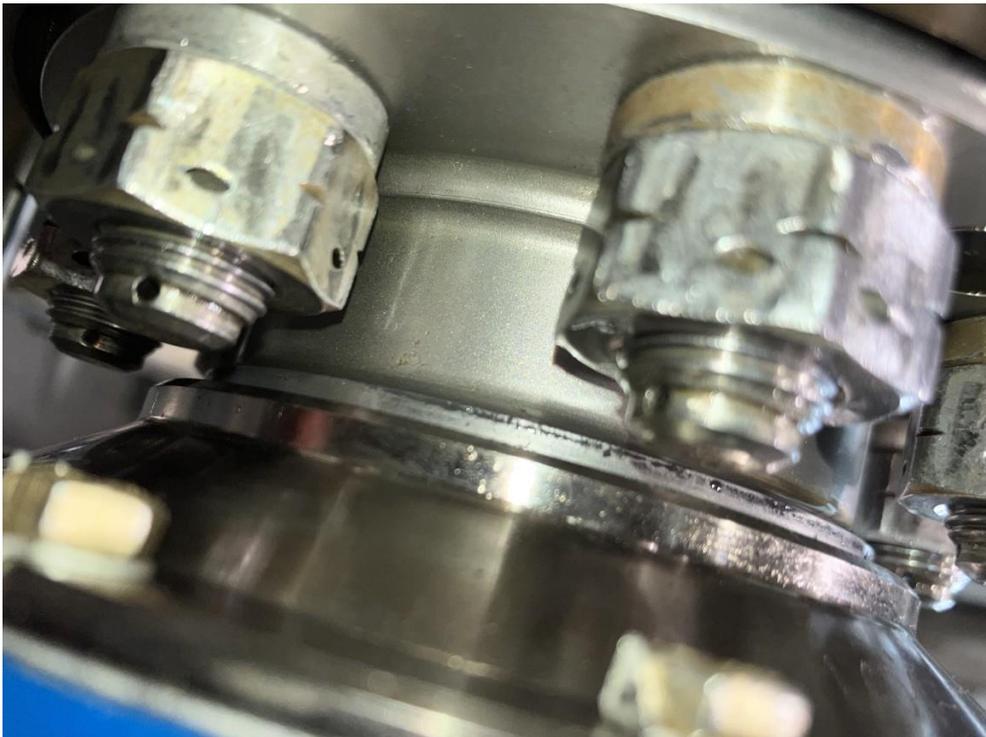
View of Propeller Shaft flange with propeller nuts and washers installed.
